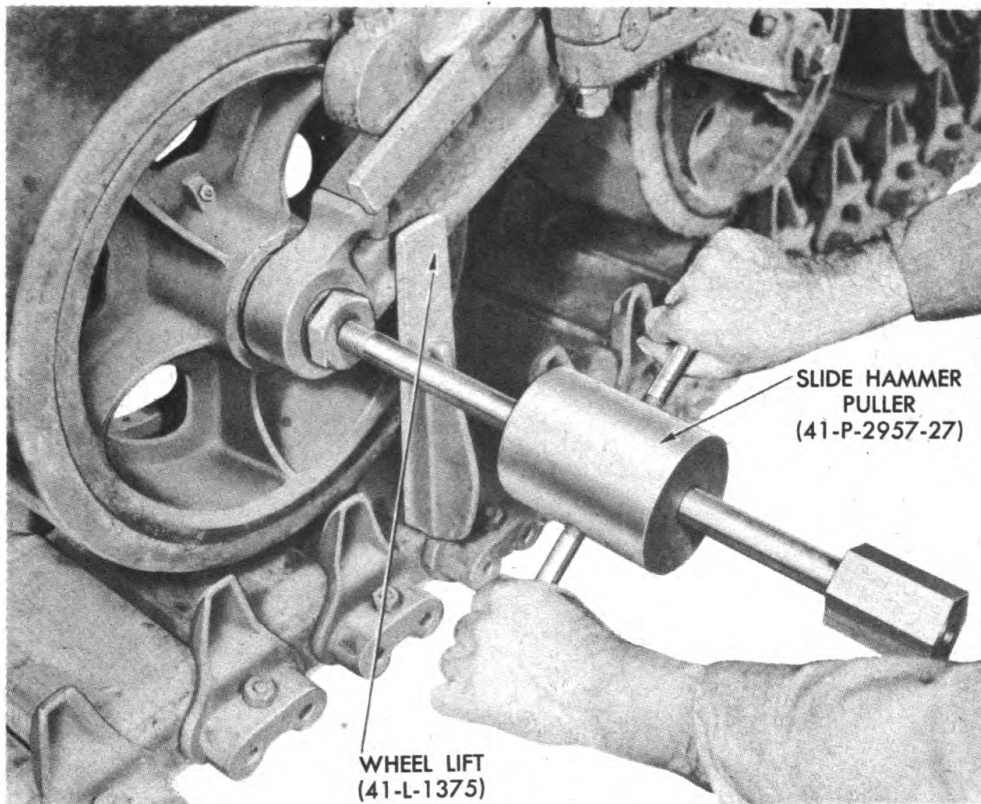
Removing Suspension Arm Wheel End Gudgeon Nut
